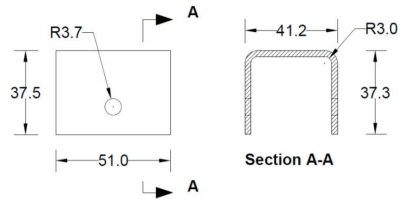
Details of main lock channel (all dimensions are in mm, steel plate gauge 11).
